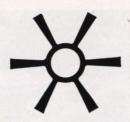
Welded assemblies can often be redesigned to extrusions. Cost is reduced, while the strength and accuracy are improved.
